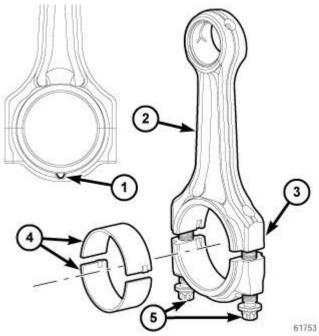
CONNECTING ROD IDENTIFICATION Courtesy of CHRYSLER LLC
